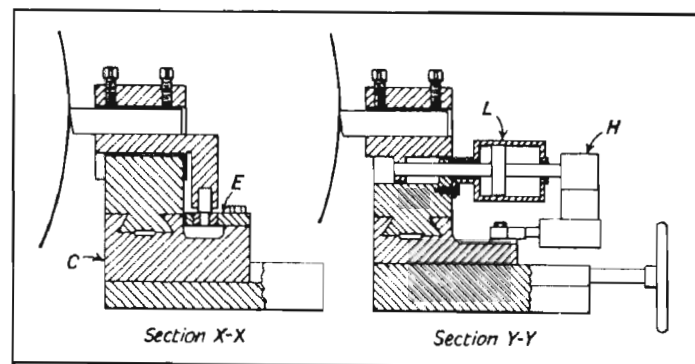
Sectional views of copying system illustrated in Fig. 21 show template *E* for tread form, and spool-valve *H* attached to piston-rod of cylinder *L*.
